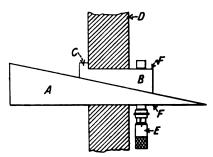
Sliding Gage Used to Measure Small Holes in Valvo Motion Levers
